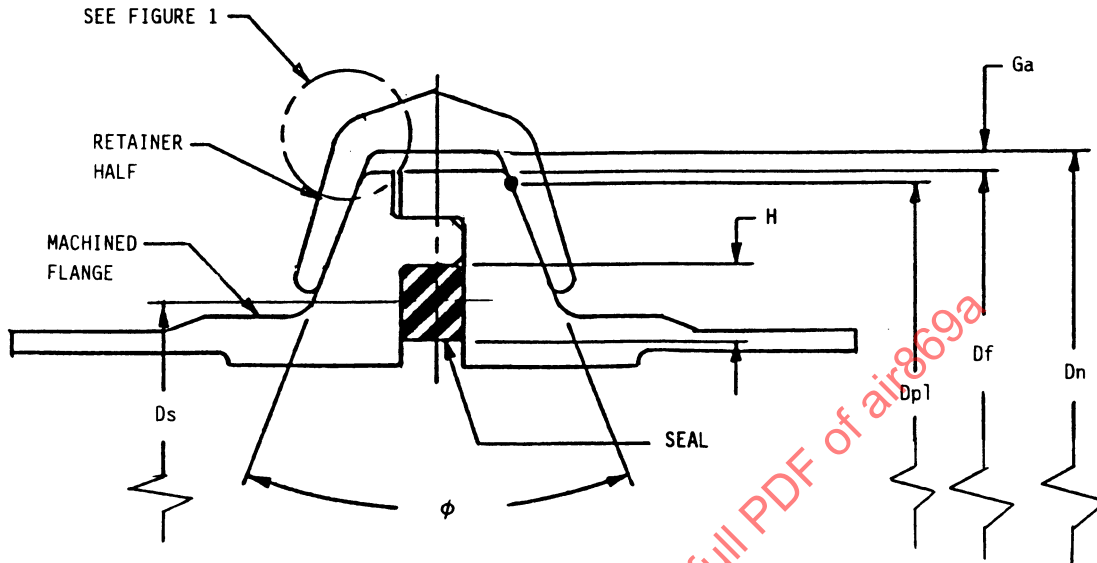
V-Retainer Coupling Joint and Machined Flanges
